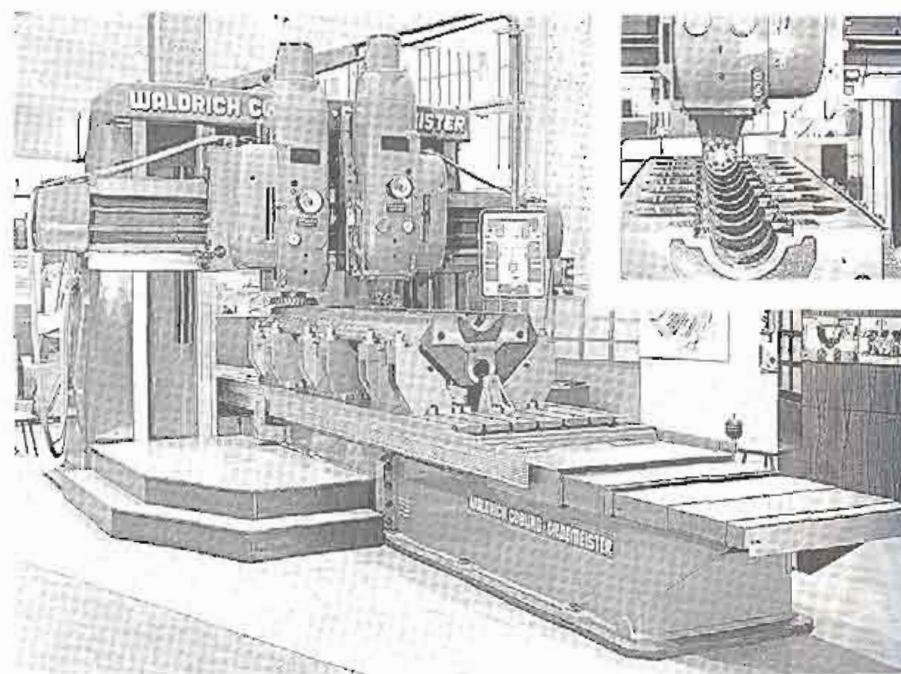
Large planer-type milling machine. Inset shows 90° head being used.
